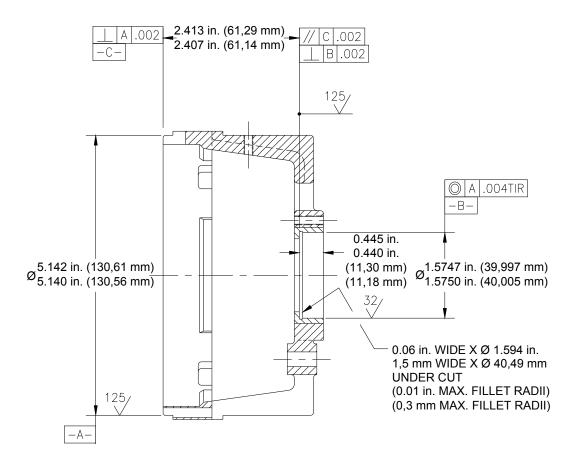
Anti-Drive End End Bell Bearing Liner Machining Specifications (IPL 10002, P/N 23081-1050 and 23032-2165)
